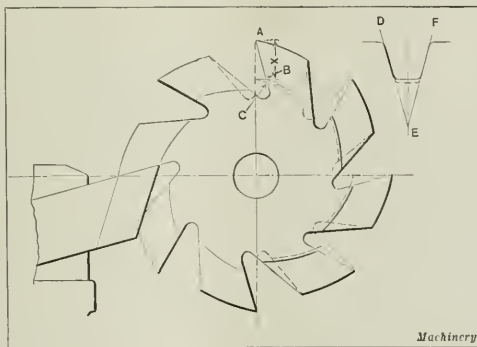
Manner of tilting Cutter when relieving Under-cut or Hooked Teeth of Hobs and Formed Milling Cutters
